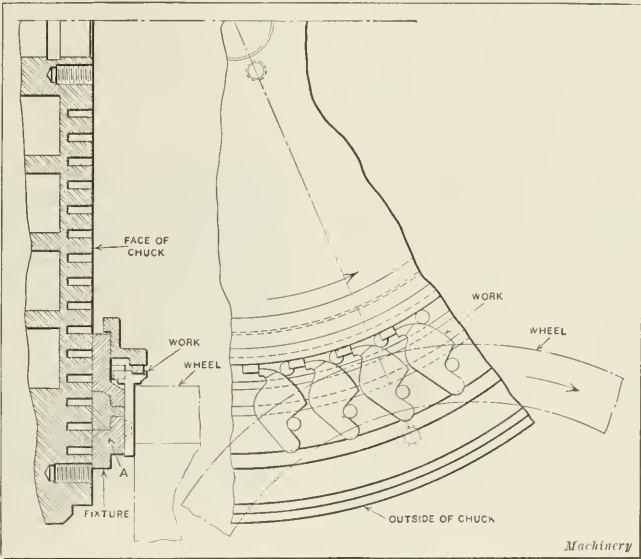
Similar Fixture to that shown in Fig. 9 for holding Jaws for Cut Nippers
